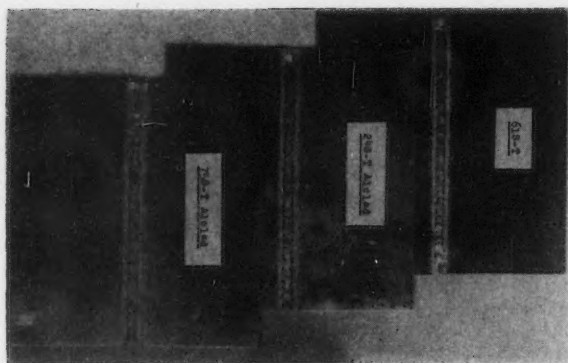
Typical welded panels of 61S-T6, 24S-T4 and 75S-T6.
